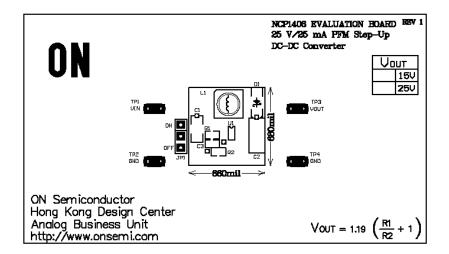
Step-Up Converter Demonstration Board Top Layer Component Silkscreen
